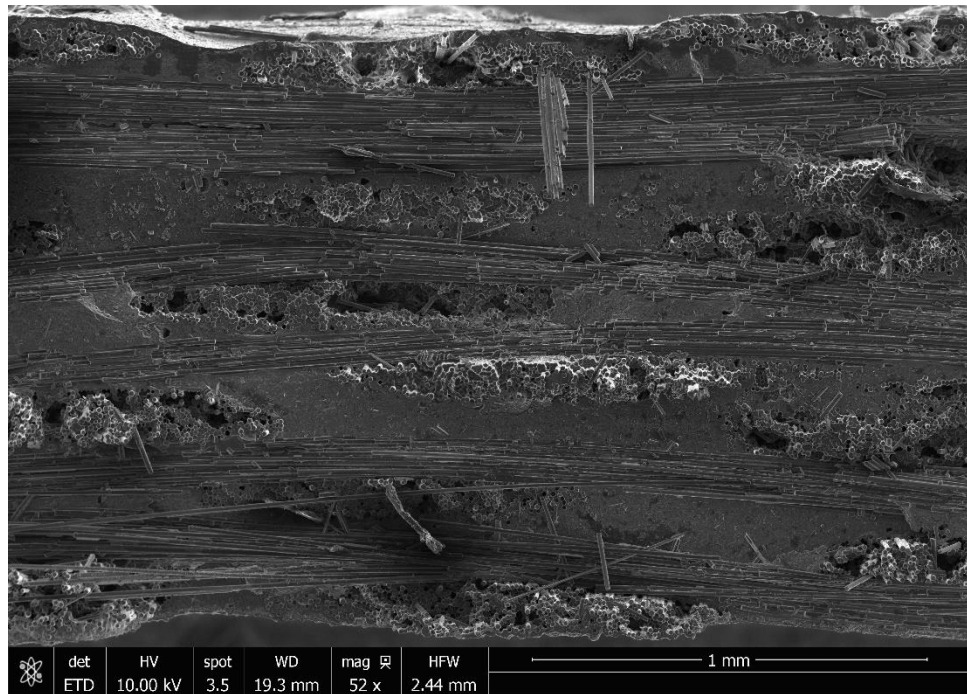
Fracture Surface for Plate 1 Annealed Dogbone Tested at MMD lab
